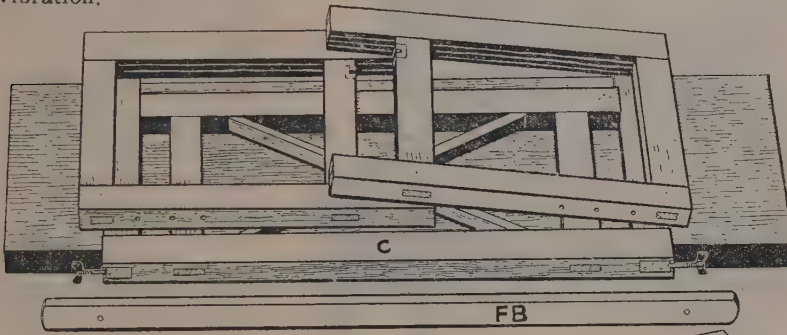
BENCH FOLDED (PIECE F, B REMOVED); ALSO DETAIL OF WING NUT AND HINGED BOLT.
